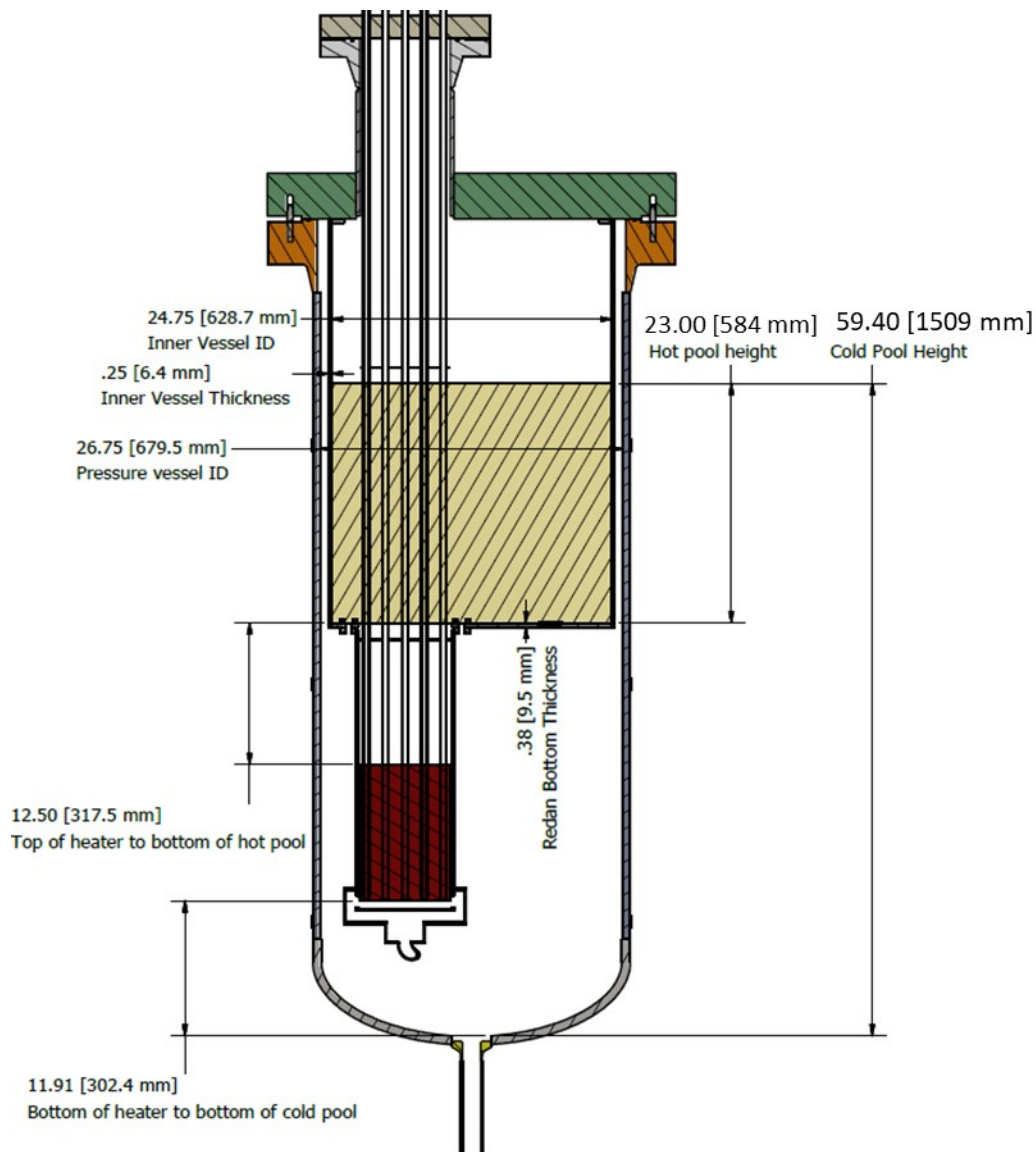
THETA pool and core geometry. Core nominal diameter: 0.2 [m] (8"), core heated length: 0.3 [m] (12")
